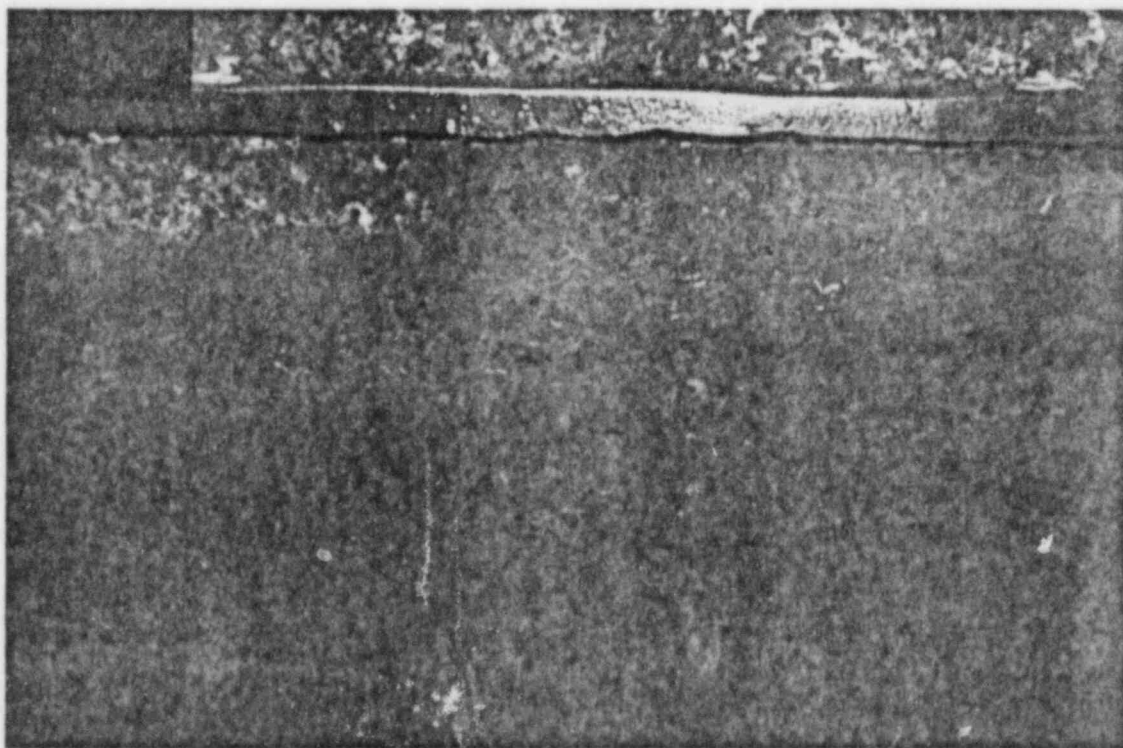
Tank 8D-2 Weldment After Wire Brushing,
